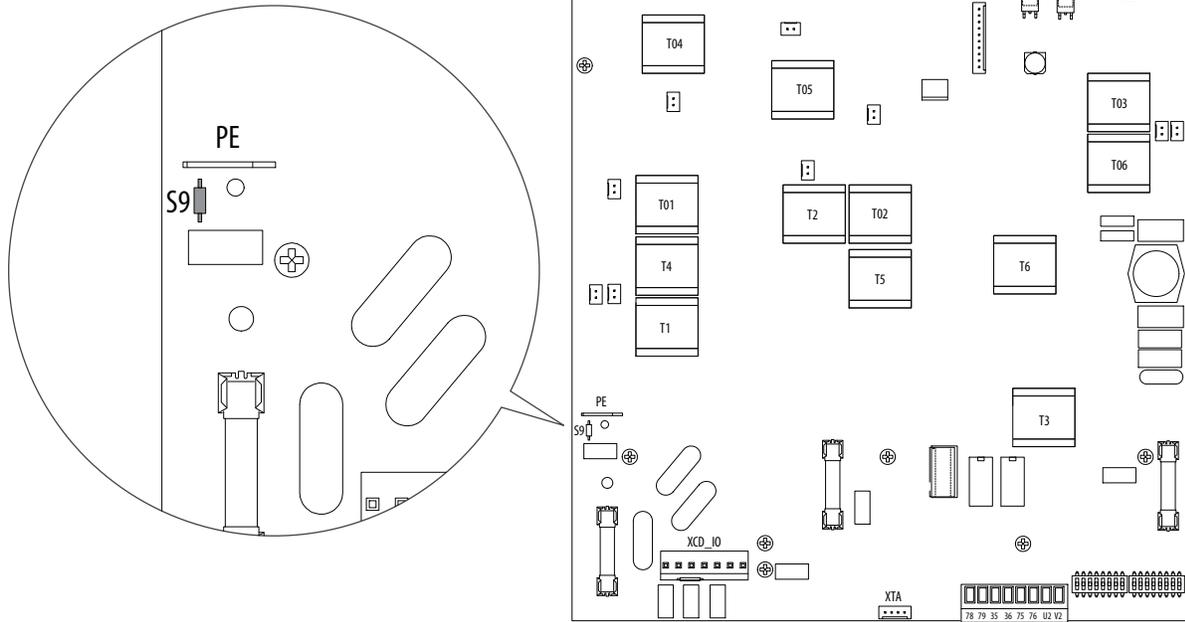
Frame C Pulse Transformer Circuit Board S9 Jumper Location
